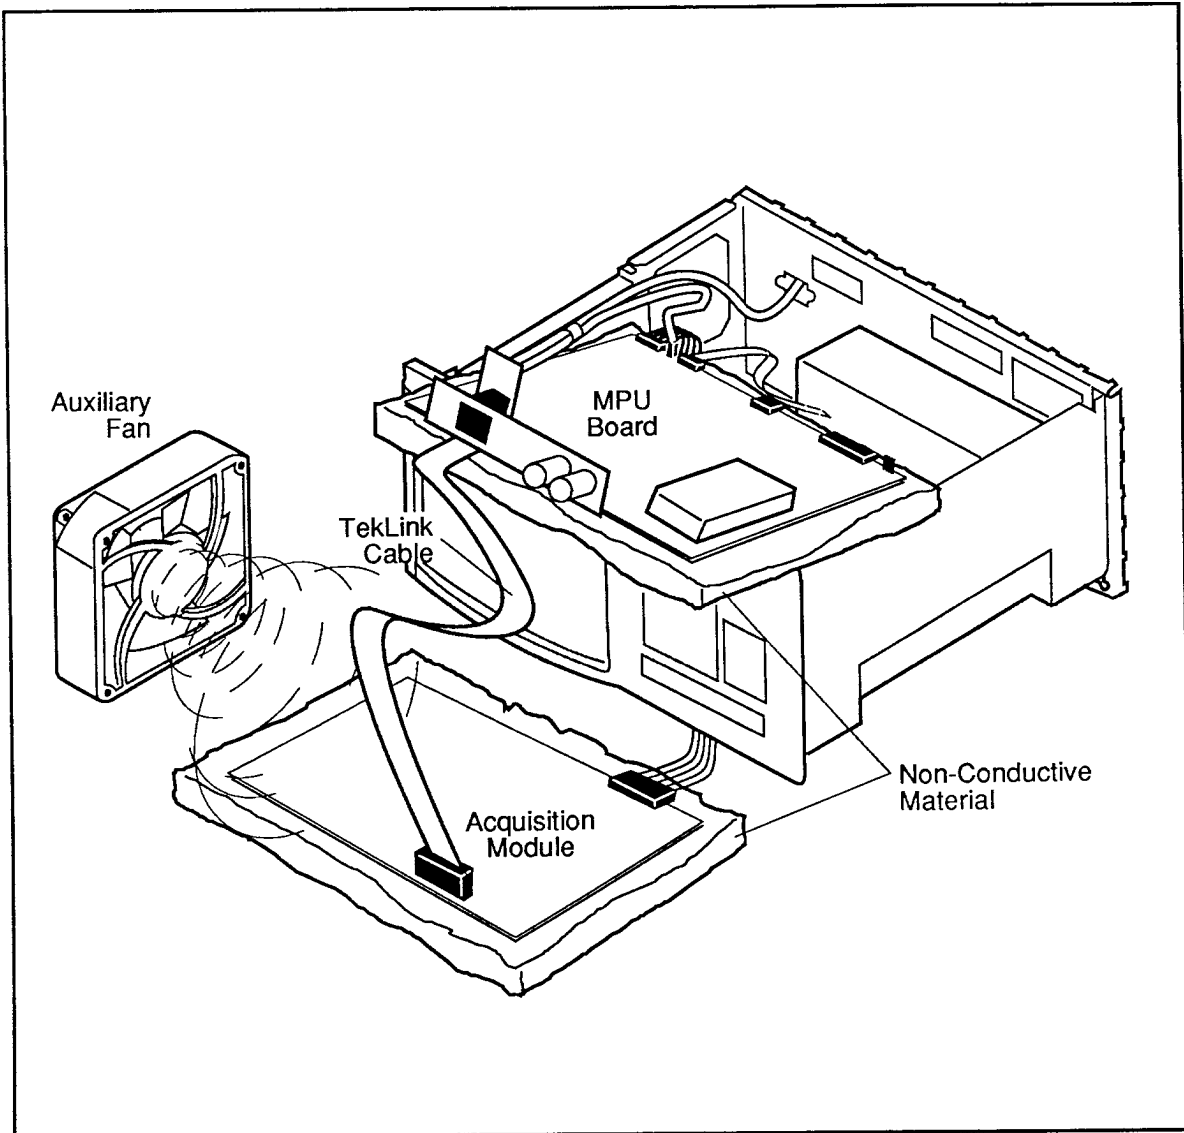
MPU board and Application module in troubleshooting position. Note auxiliary fan used to cool module.
